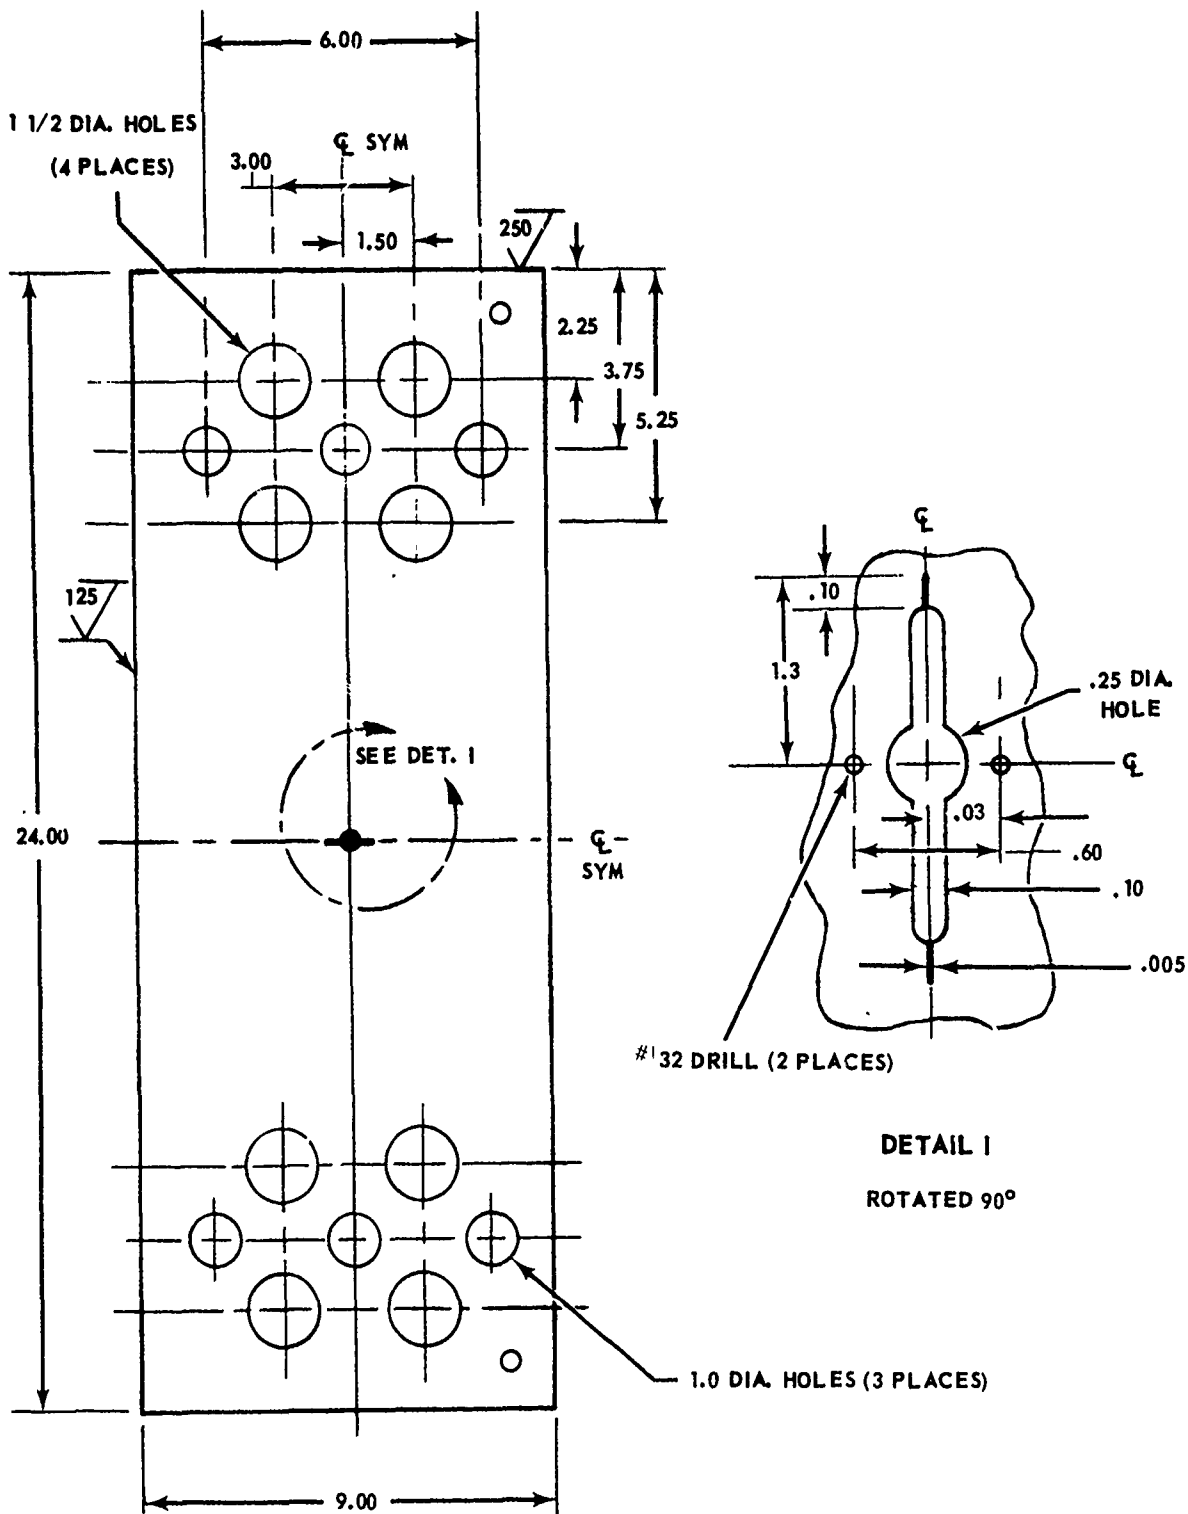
1 INCH CENTER NOTCH SPECIMEN
